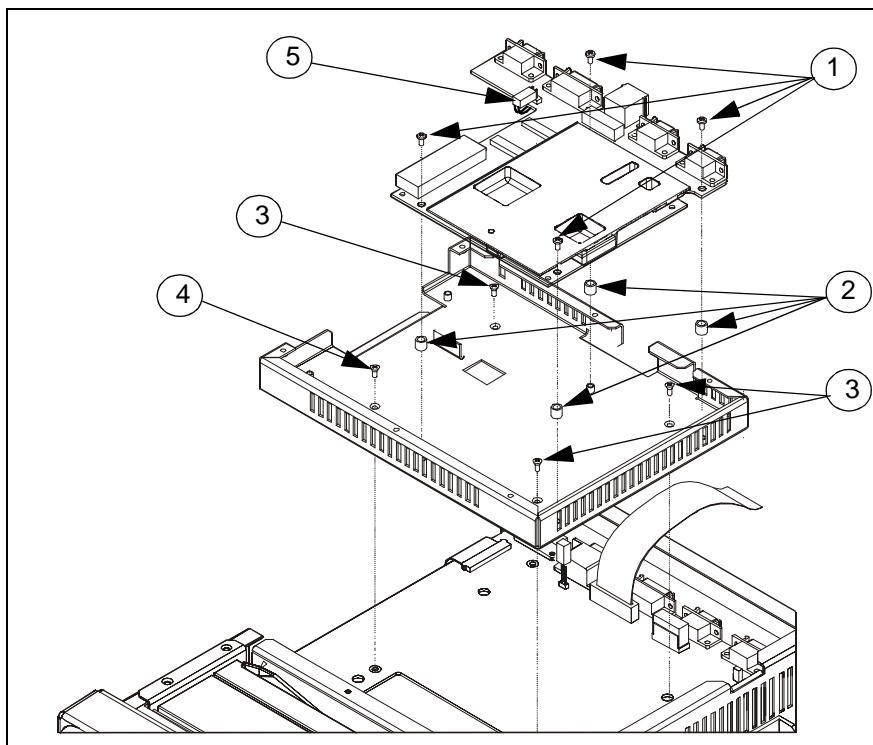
Removing/Installing Adv. Comm Option PC board
